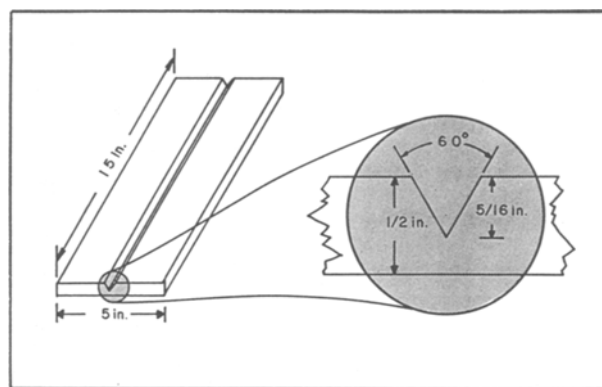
Joint geometry of the single-v-grooved welds.
